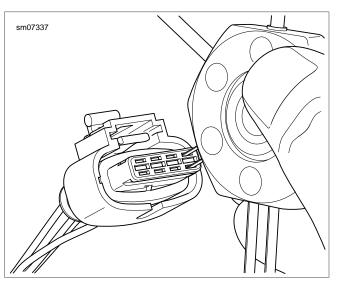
Terminal Removal: Bosch Compact 1.1M Connector
